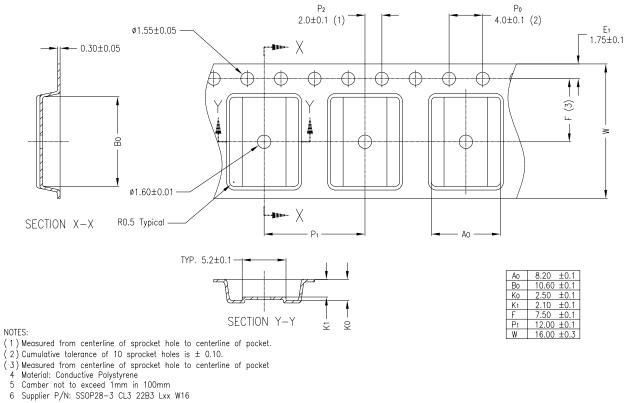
28-Pin SSOP Carrier Tape Drawing
